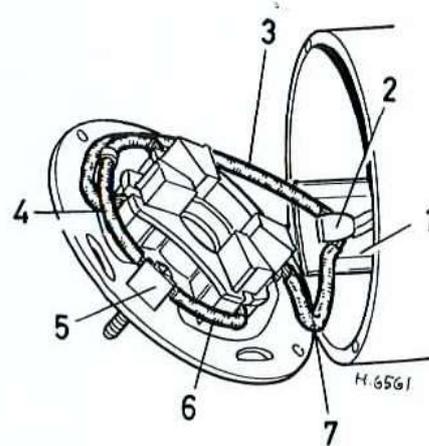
Commutator end bracket assembly – Lucas M35J (Sec 26)
